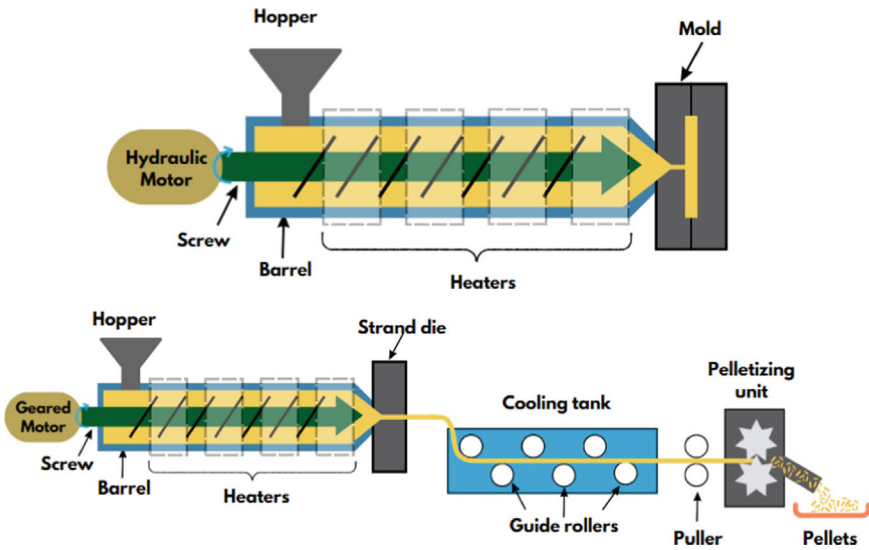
Schematic of direct injection molding and extrusion-injection molding
